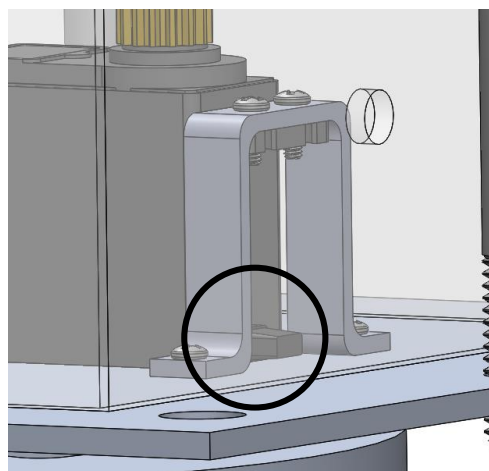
Location of servo motor electrical wires that will connect to the Arduino
